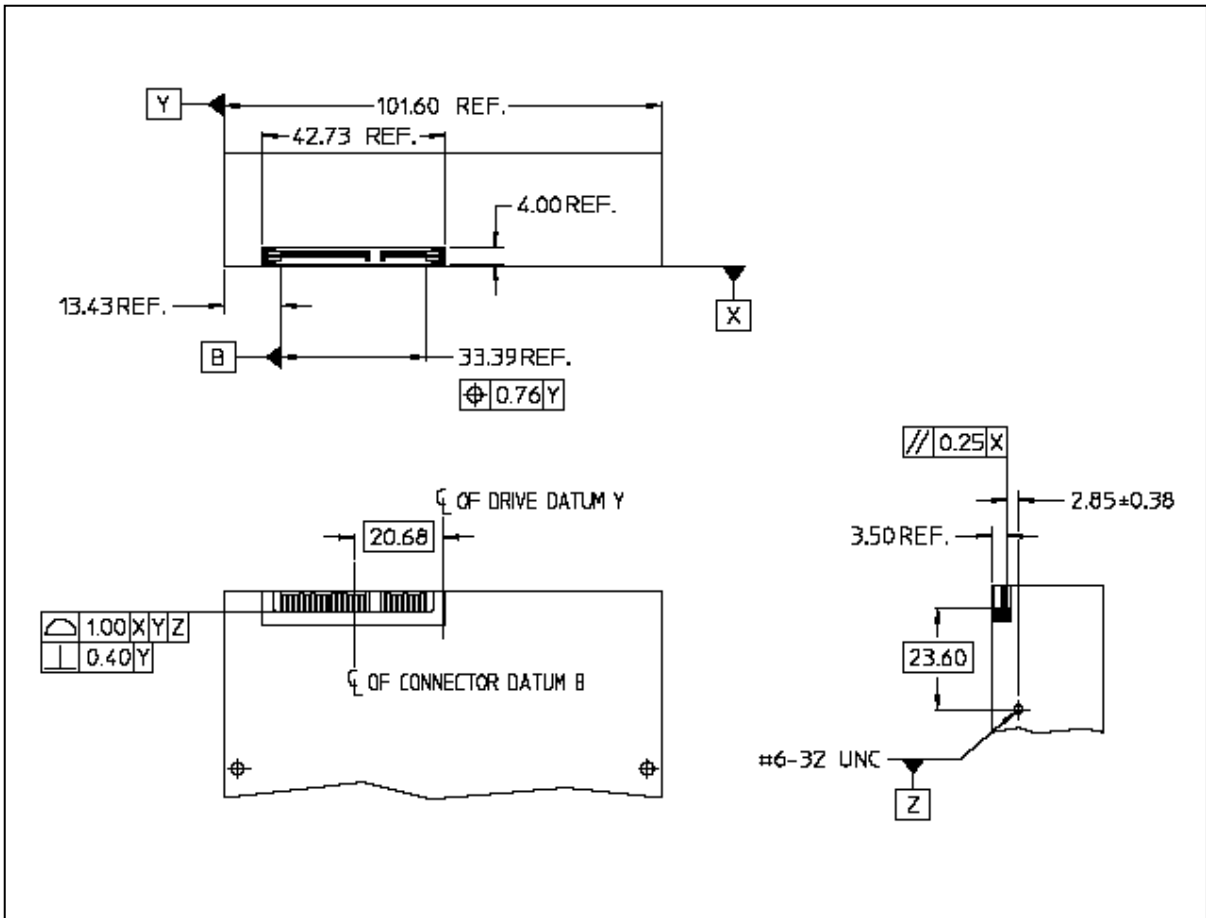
Device Plug Connector Location on 3.5” Side Mounted Device
